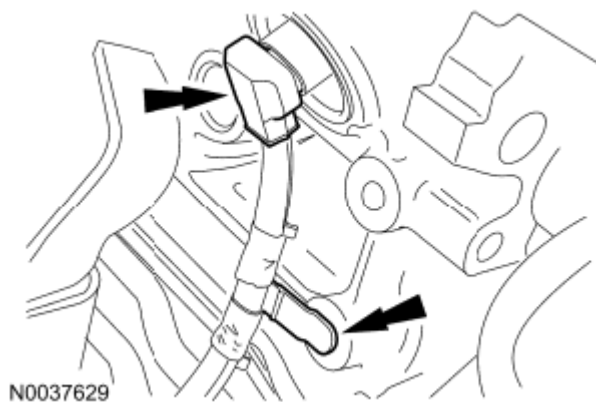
Locating Block Heater Electrical Connector And Wiring Harness Retainer
